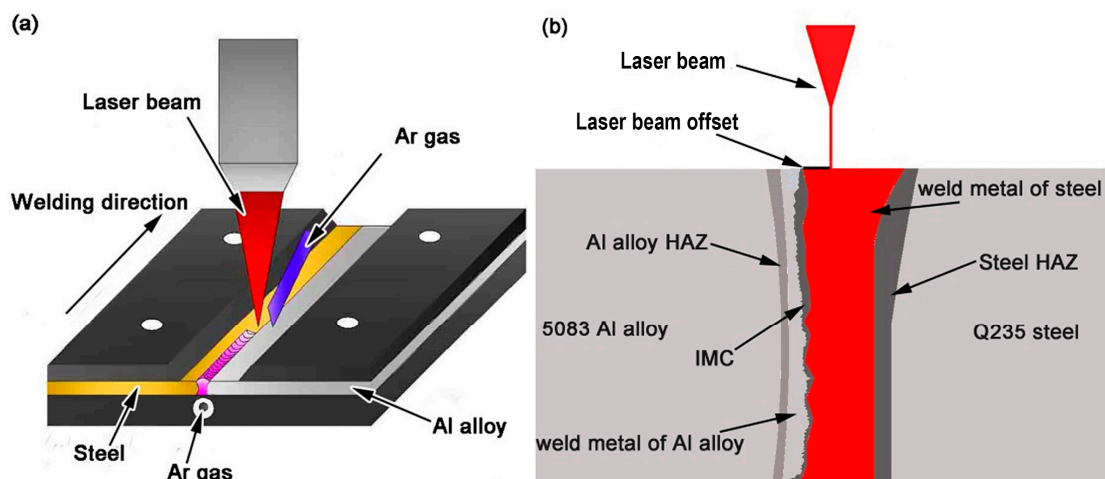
Schematic illustration of laser keyhole welding of Al/steel butt joints: (a) welding setup; (b) principle of laser keyhole welding.
